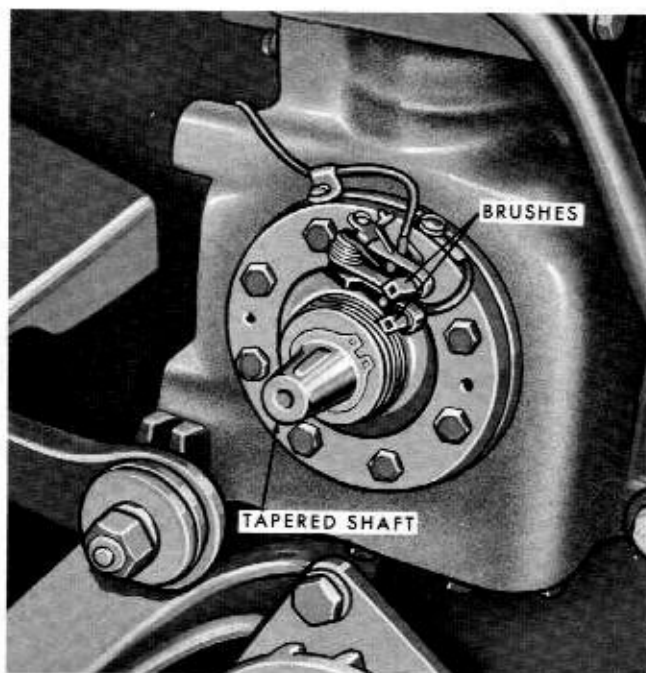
B-3—Compressor Assembly, Clutch Removed—(61LT-8810)
